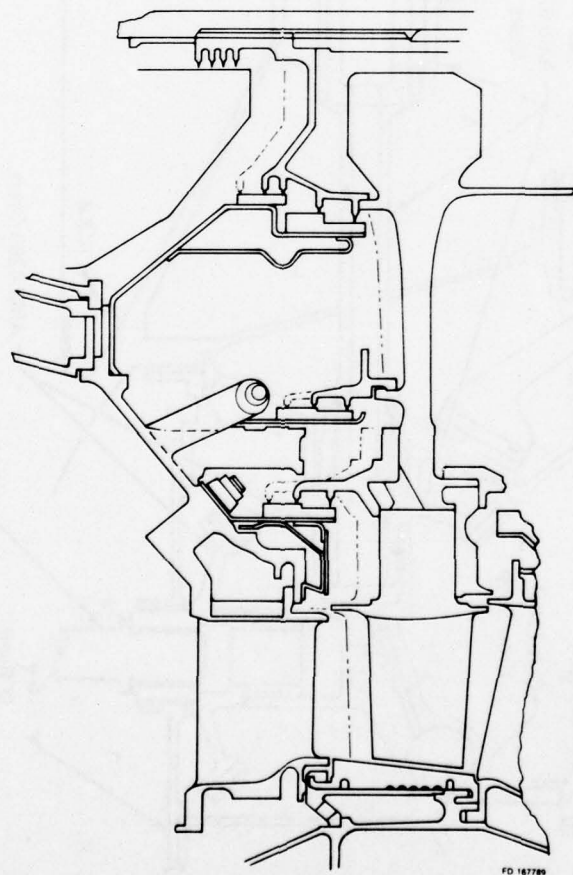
Turbine Rotor Shift Stages 1 and 2 Sketch No. 4
